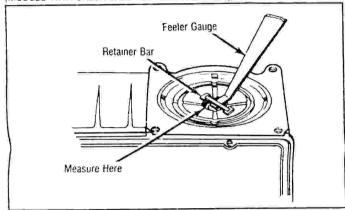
Accelerator Pump Inlet Check Ball Clearance (Models With Check Ball Relainer Bar Only)
